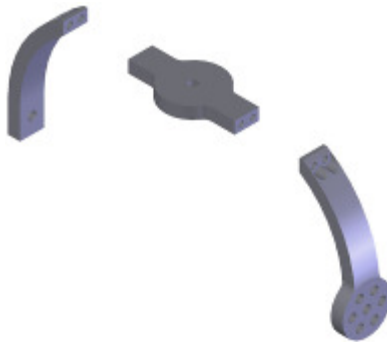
Shoulder arch redesigned for easier manufacturing as an assembly of 3 pieces
